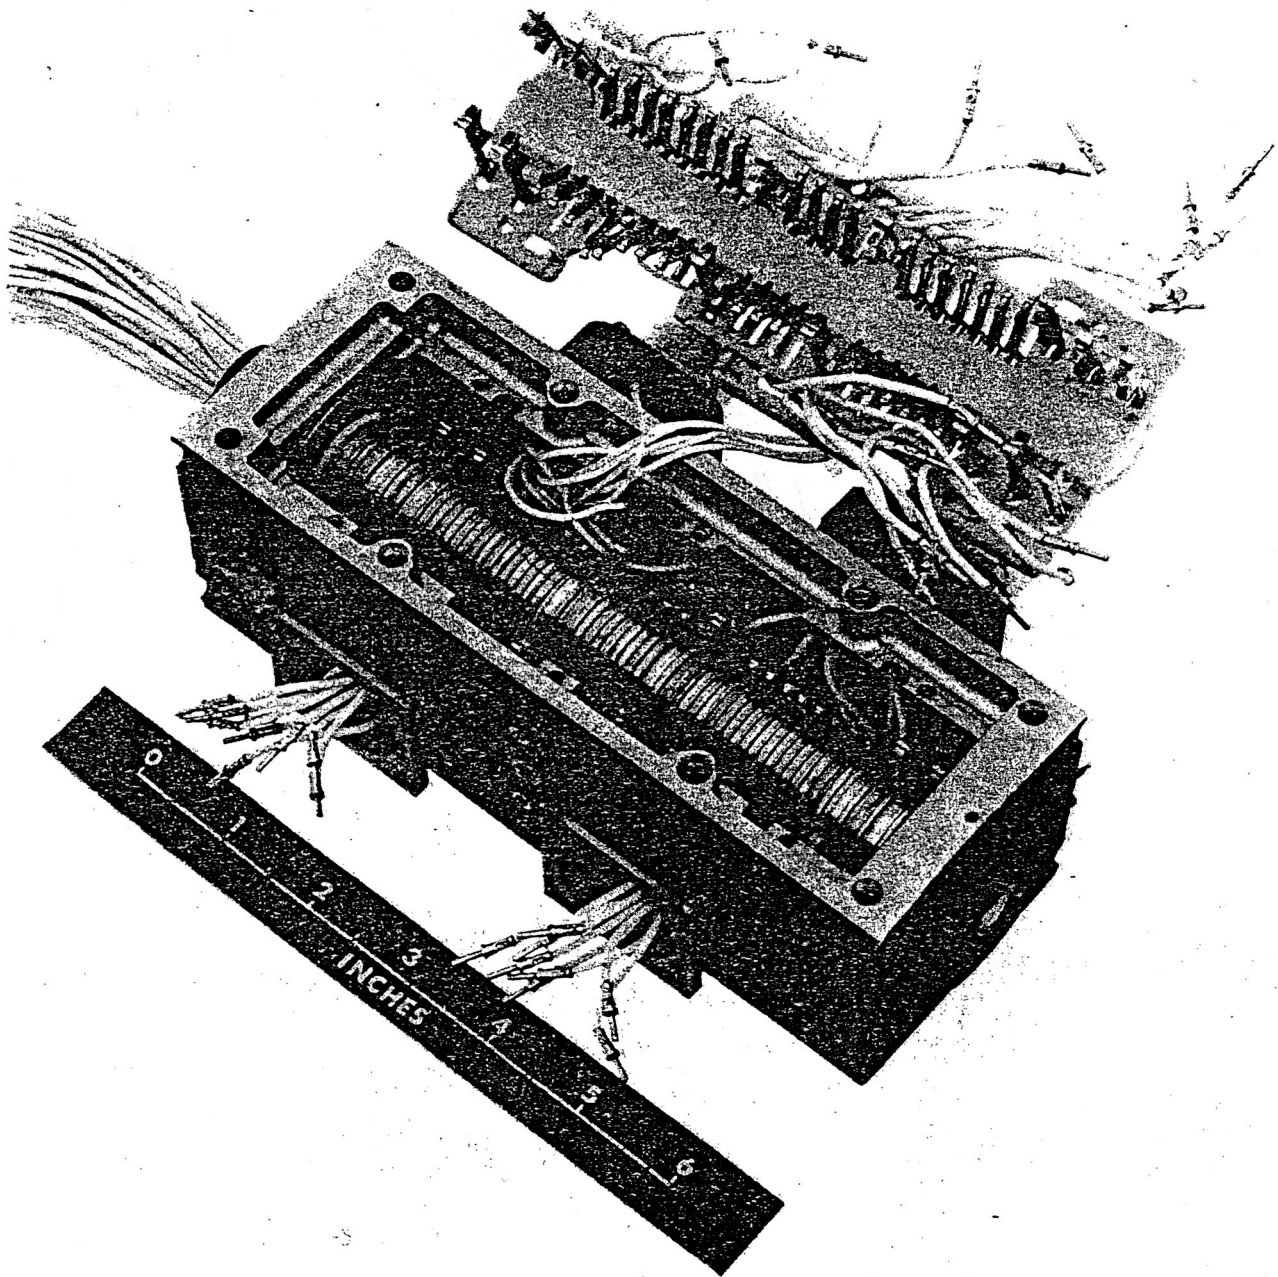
Slip Ring Assembly with Top Brush Block Removed
